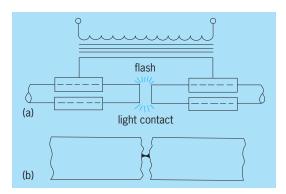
Elements of flash-welding operation. (a) Two pieces of horizontally clamped metal are brought together to make a light contact. At that time the welding circuit is closed to the transformer. (b) Current starts flowing when small areas of the workpiece make initial contact. (After A. L. Phillips, ed., Welding Handbook, 4th ed, American Welding Society, 1957)
